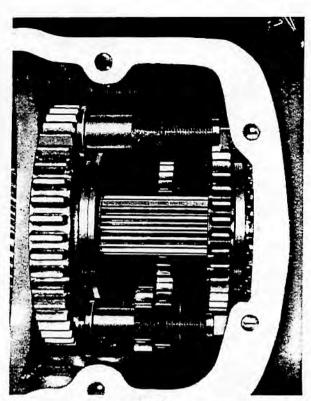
LOW AND INTERMEDIATE HIGH GEARS WEDGED
